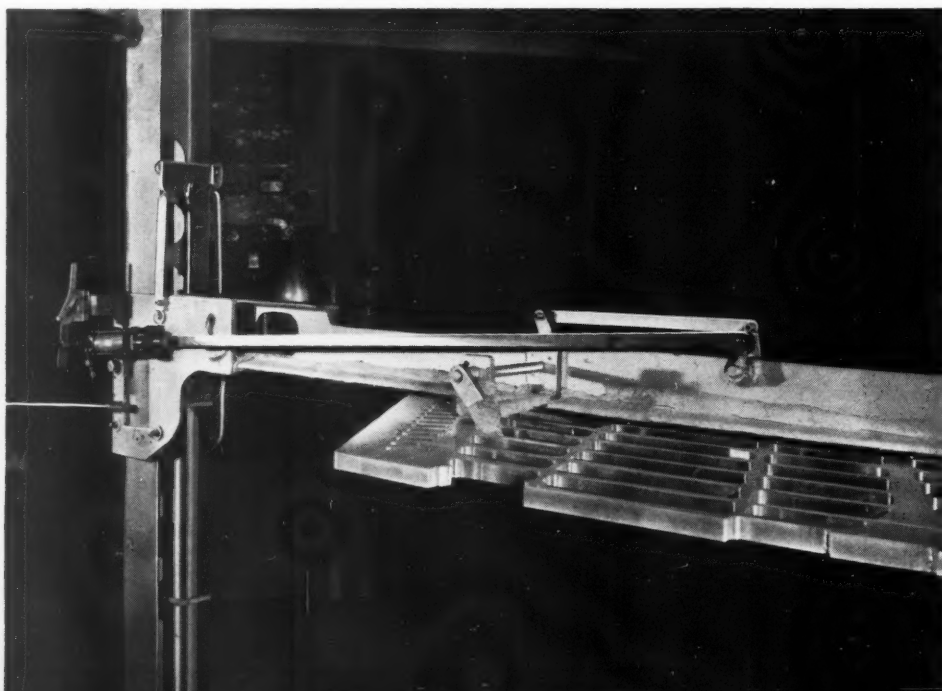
Close-up view of the arm on the loading device clearly showing the mechanism that is employed for operating the grid-holding claws.
